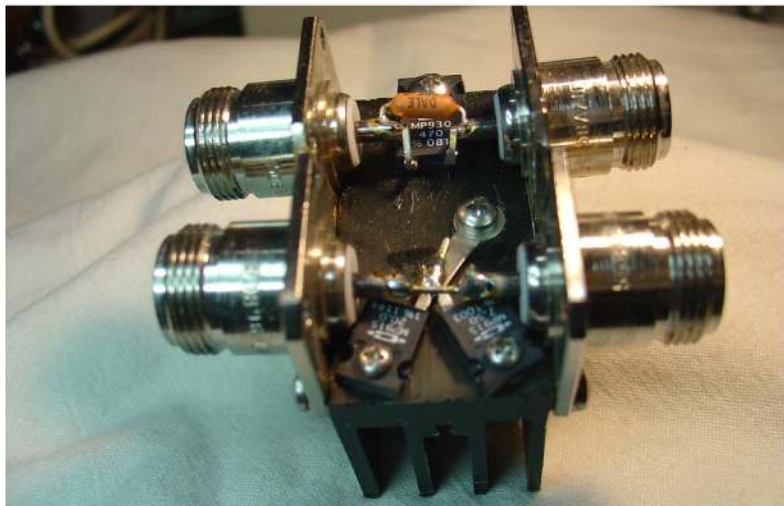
10:1 SWR Hi-Z/Lo-Z assembly.
